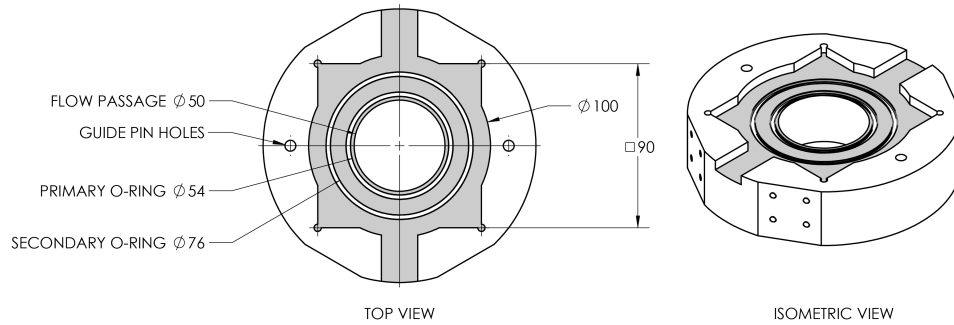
Schematic of lower test section holder, indicating the seating surface for a perforated sheet in gray
